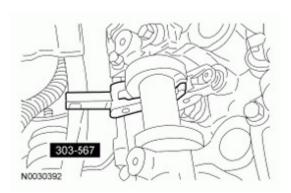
Compressing Valve Spring Using Valve Spring Compressor Courtesy of FORD MOTOR CO.
